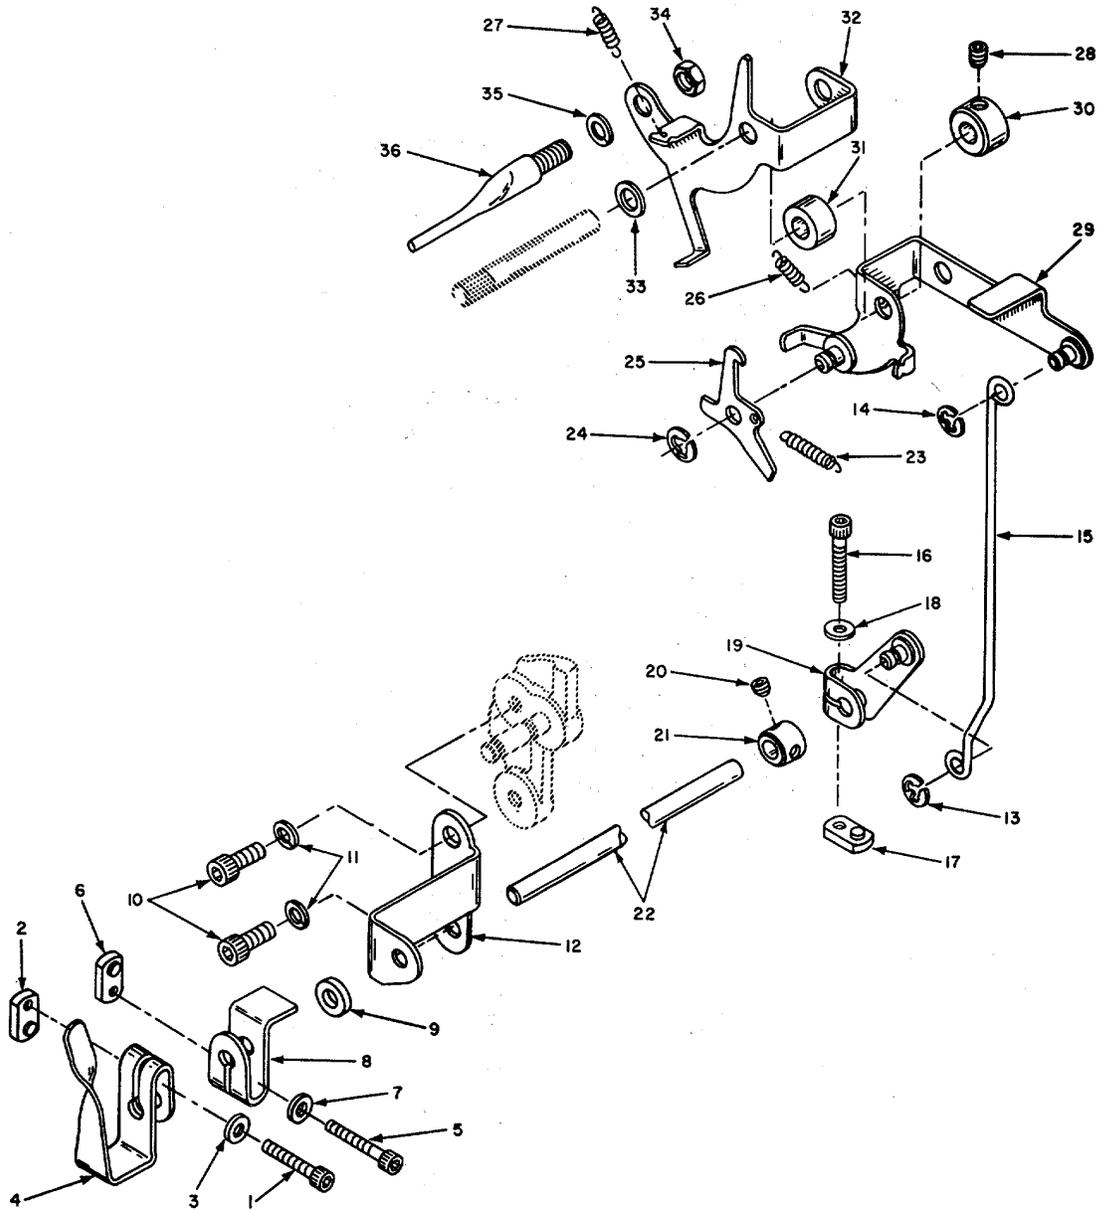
Manual tape feed-out mechanism, exploded view.
